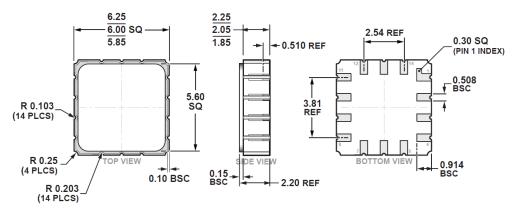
14-Terminal Ceramic Leadless Chip Carrier (LCC). Dimensions are shown in millimeters.
